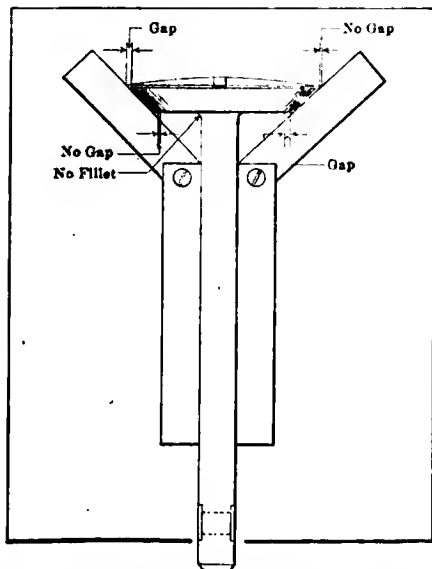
Cone type of valve without a fillet between the head and the stem which warps when heated.
